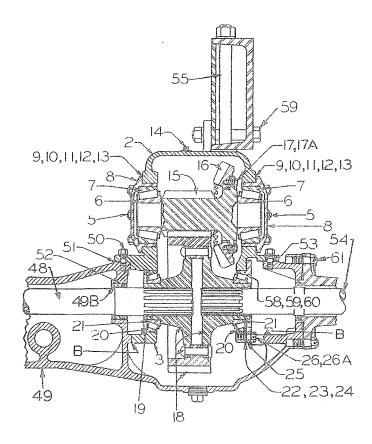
A. Rear Axle Gear and Pinion Carrier (Machines H-4670 and up)
